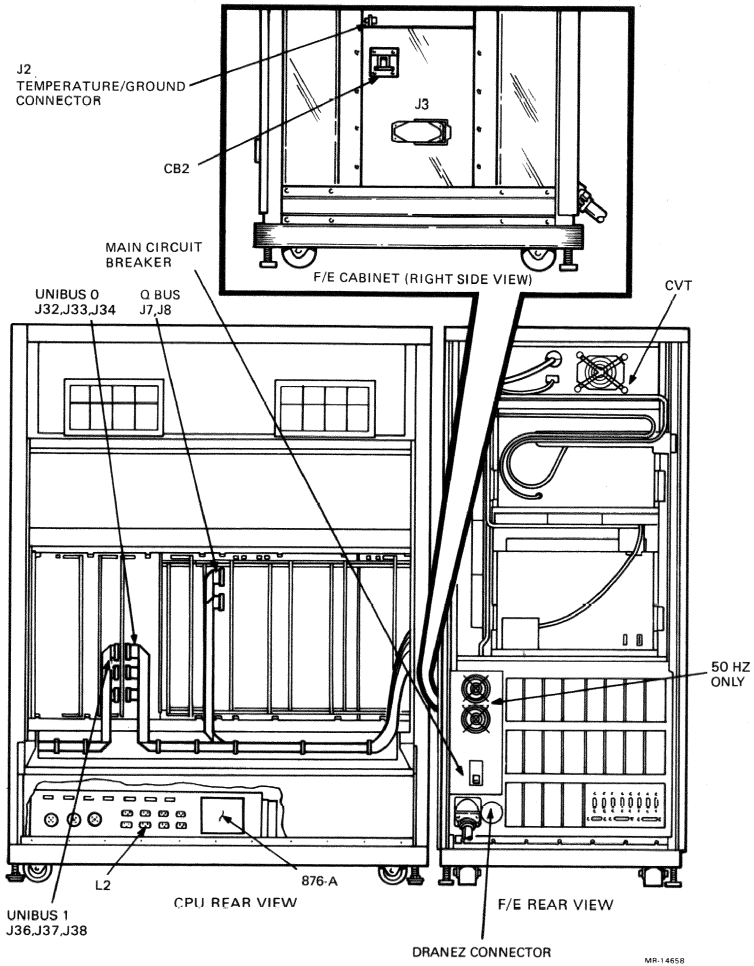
Front End Cabinet Cable Connections - Rear View
